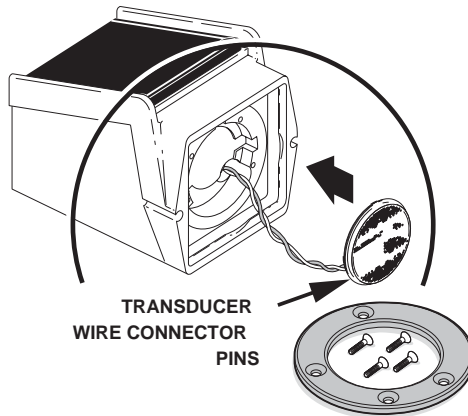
Remove Transducer, Cut Ty-Wrap, and Remove Connectors
